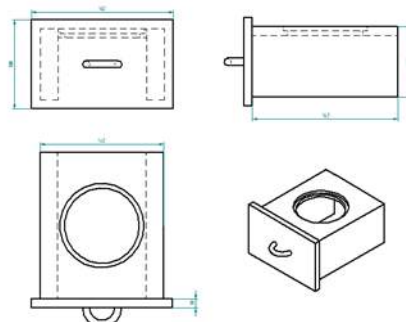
Front View, Top View & Isometric View of Dust Collecting Chamber
